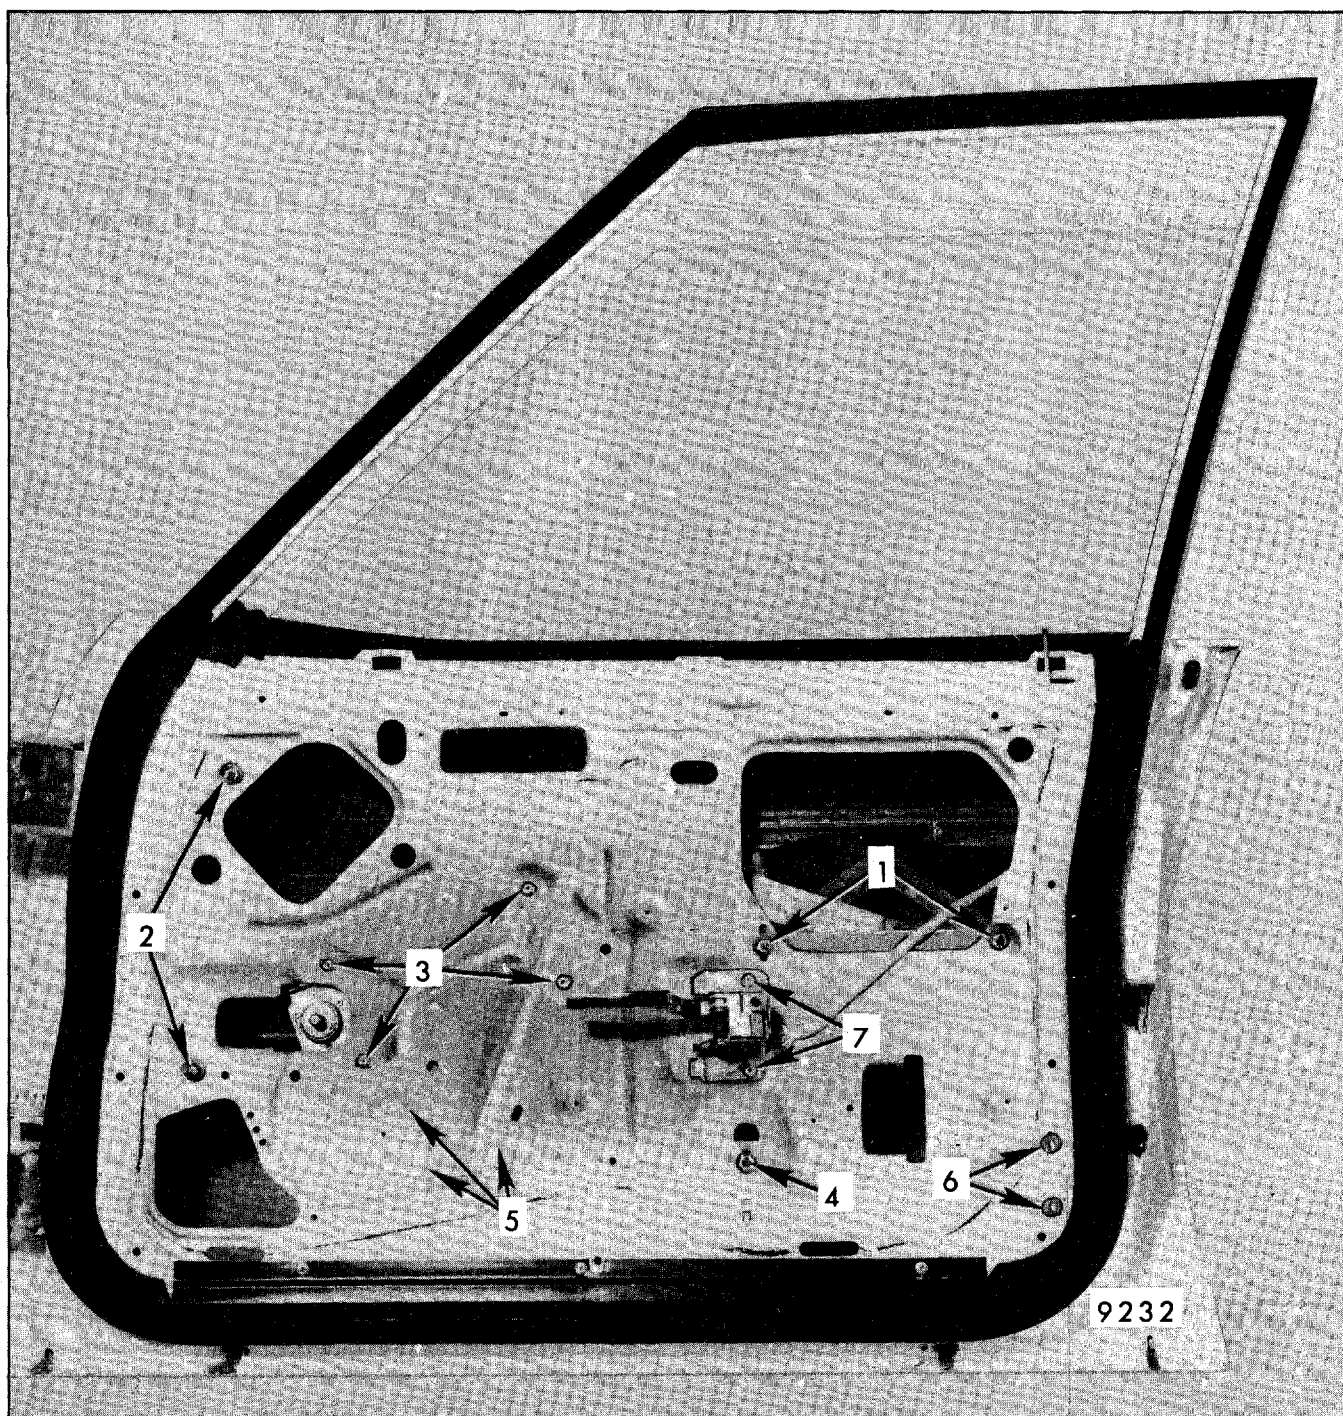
Front Door Hardware Attachments - "B, C" Styles (Sedan Door Shown, Coupe Door Similar)
